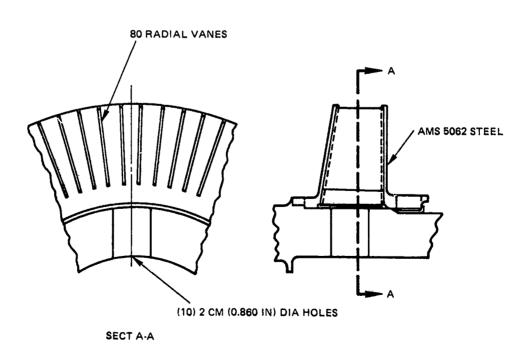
Shrouded Fan Deoiler Assembly
